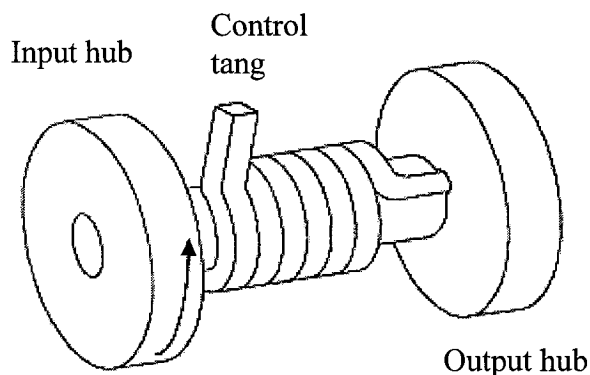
An isolated view of the wrap-spring clutch (adapted from [21]).
